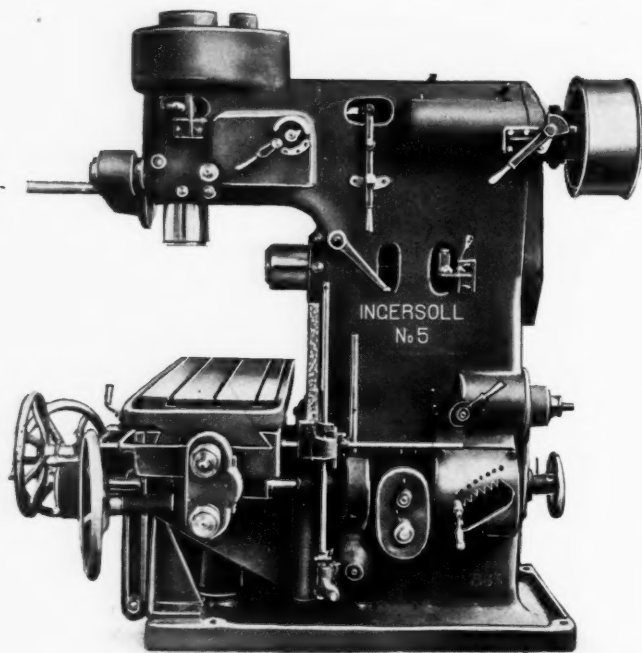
The Largest Size of the Ingersoll Combined Vertical and Horizontal Column Type Miller
